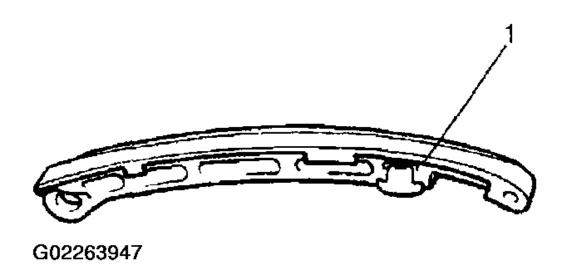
Checking Timing Chain Tensioner Shoe Courtesy of SUZUKI OF AMERICA CORP.
